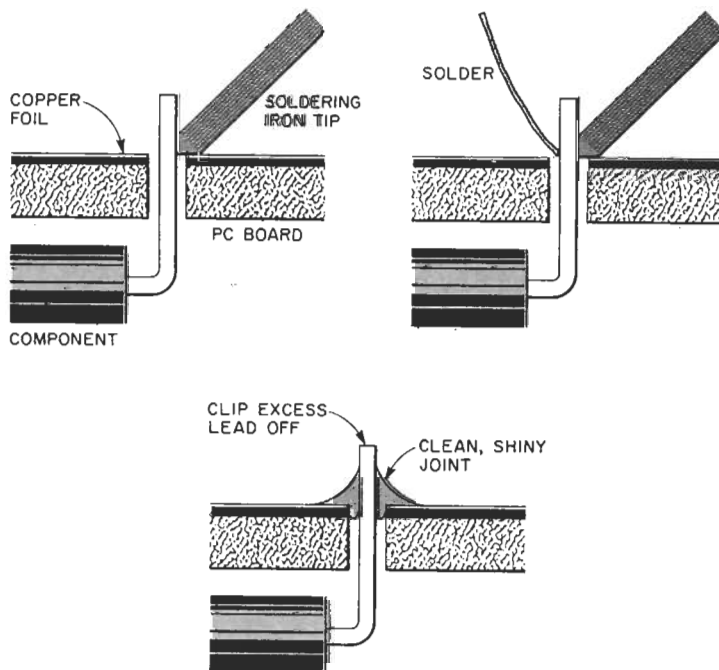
Steps in soldering. Place heated iron to junction of parts to be soldered (top left). Bring flux-cored solder to the joint after it is hot enough to melt solder (top right). When a smooth-contoured fillet has formed, remove the solder and allow to cool without moving.
